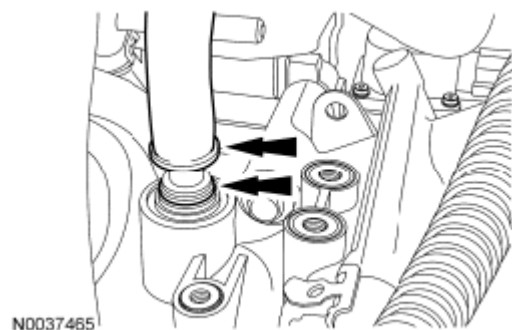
Locating Brake Booster Vacuum Supply Tube & Locking Ring
